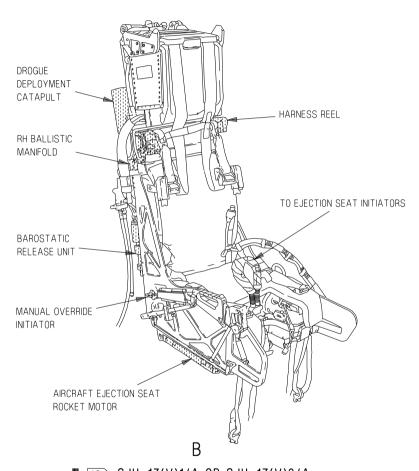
Flammable Liquids, Compressed Gasses and Explosive Devices (Sheet 6)
